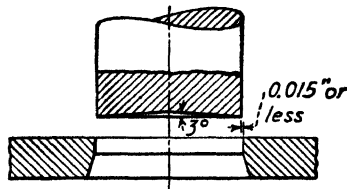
Clearance between punch and die for magnesium must be held to a minimum. A slight rake often helps the punch shear a smooth edge.
